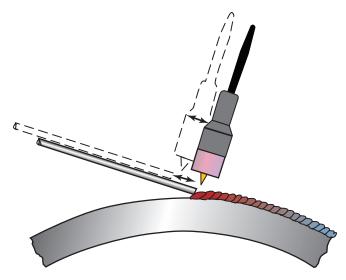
The torch and filler rod are moved back and forth together.
